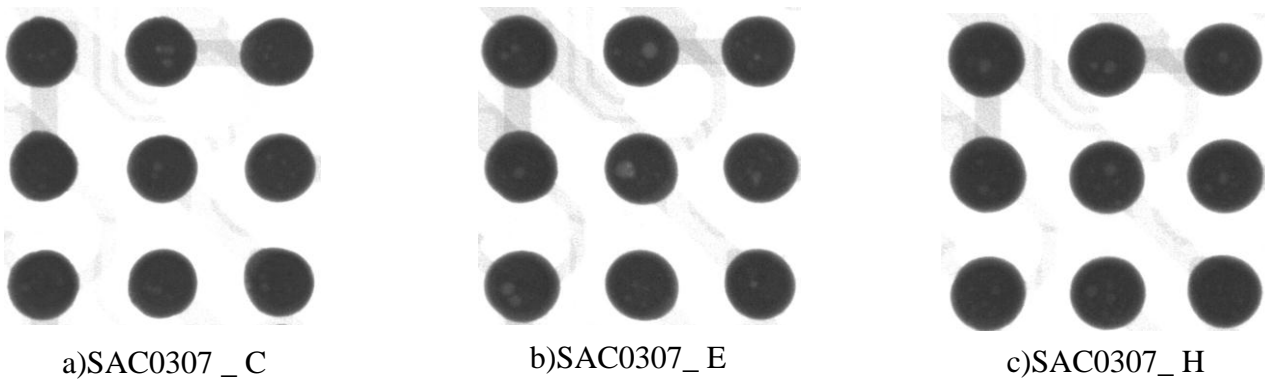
X-Ray images of BGA solder joints reflowed with SAC0307 solder pastes. Good SAC0307 solder paste (13a) had similar voiding level as SAC305 solder paste. Many evaluated SAC0307 solder pastes (13b,c) had slightly more voids than the control SAC305 solder paste.
